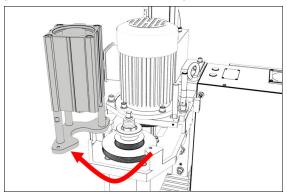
Power Drawbar cylinder pivoted to the left.
